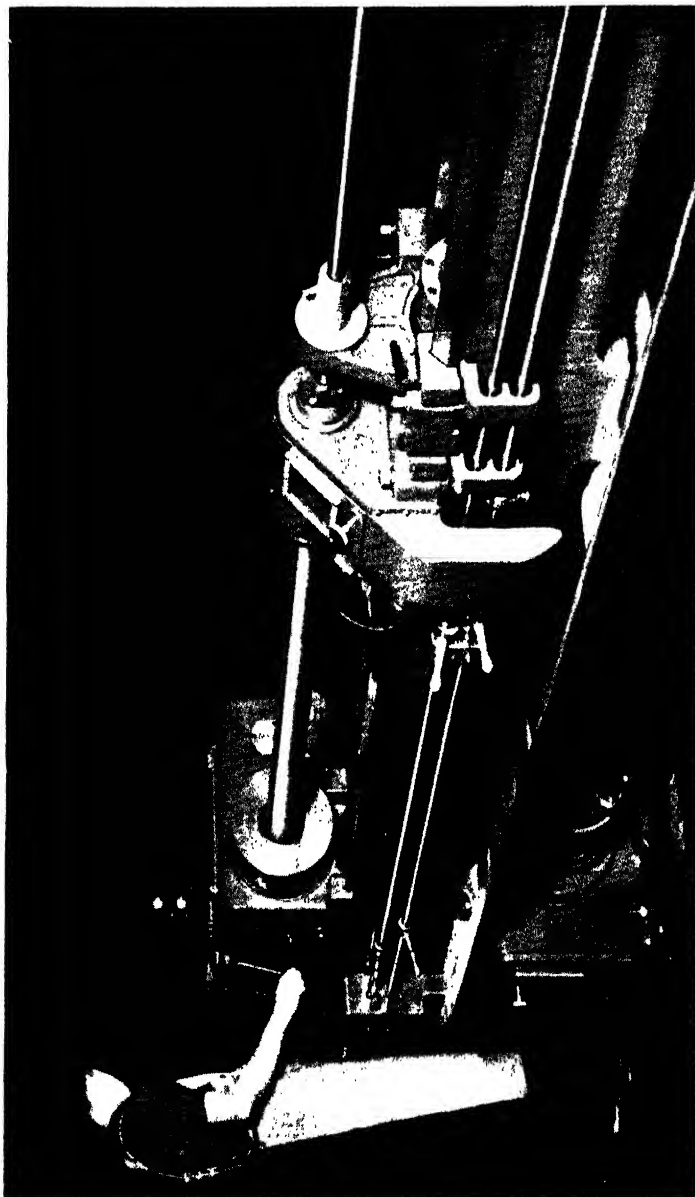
Boring an Anti-aircraft Gun Barrel the Full Length with a Wood-packed Tool Bit Having Two Cutting Edges
